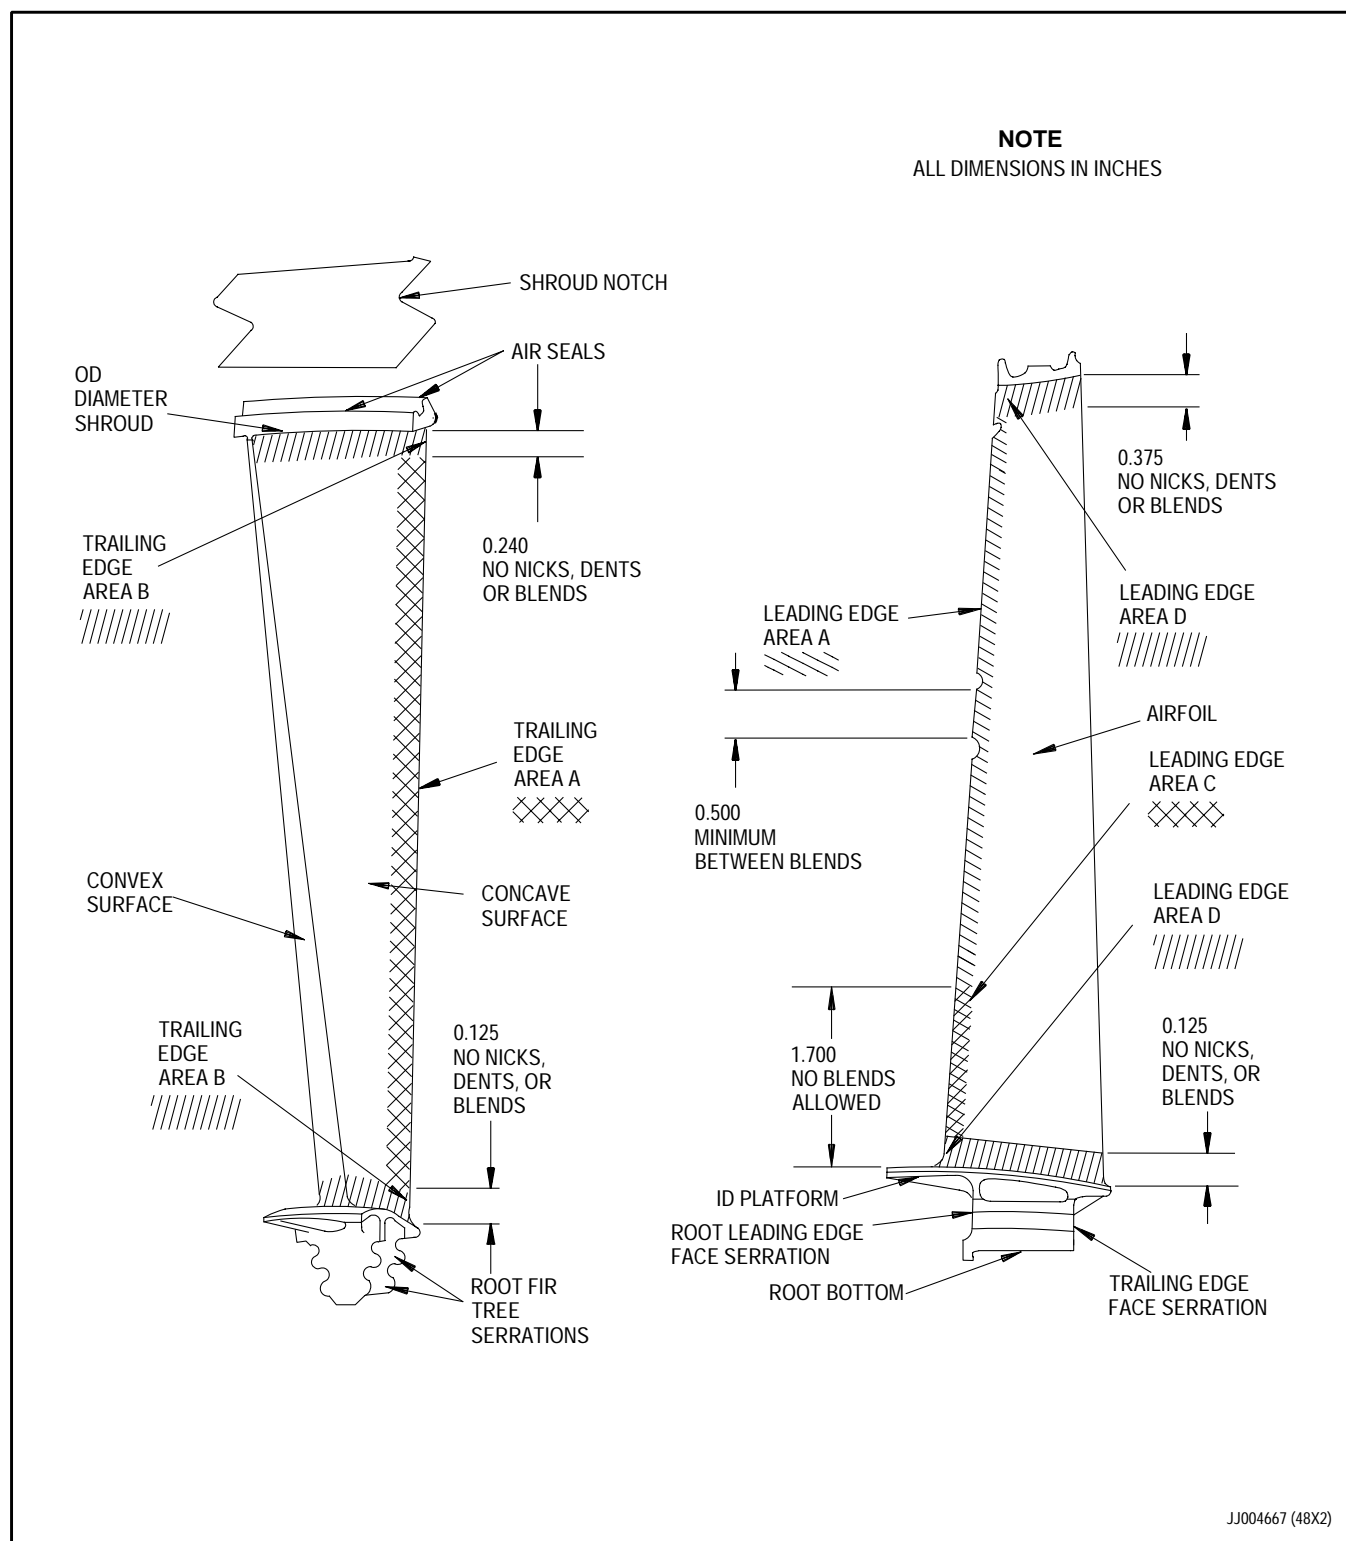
Fourth Stage Turbine Rotor Blades - Repair
